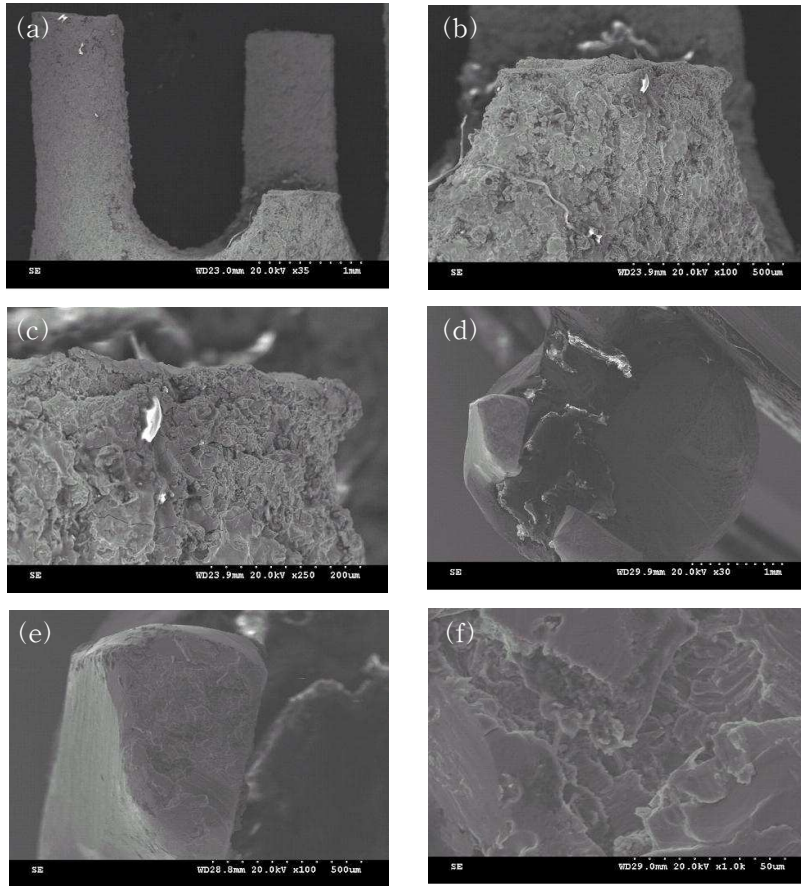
SEM showing the fractured surface morphology of 120 month used fixture.
